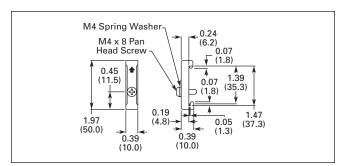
PFP-M DIN Rail End Stop — Approximate Dimensions in Inches (mm)
